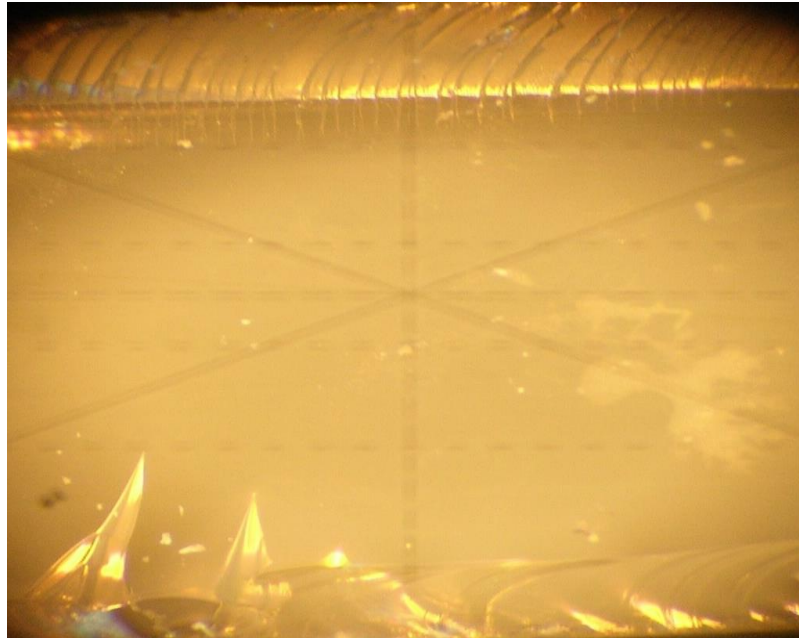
End view of a glass wafer when cutting with a diamond tool
